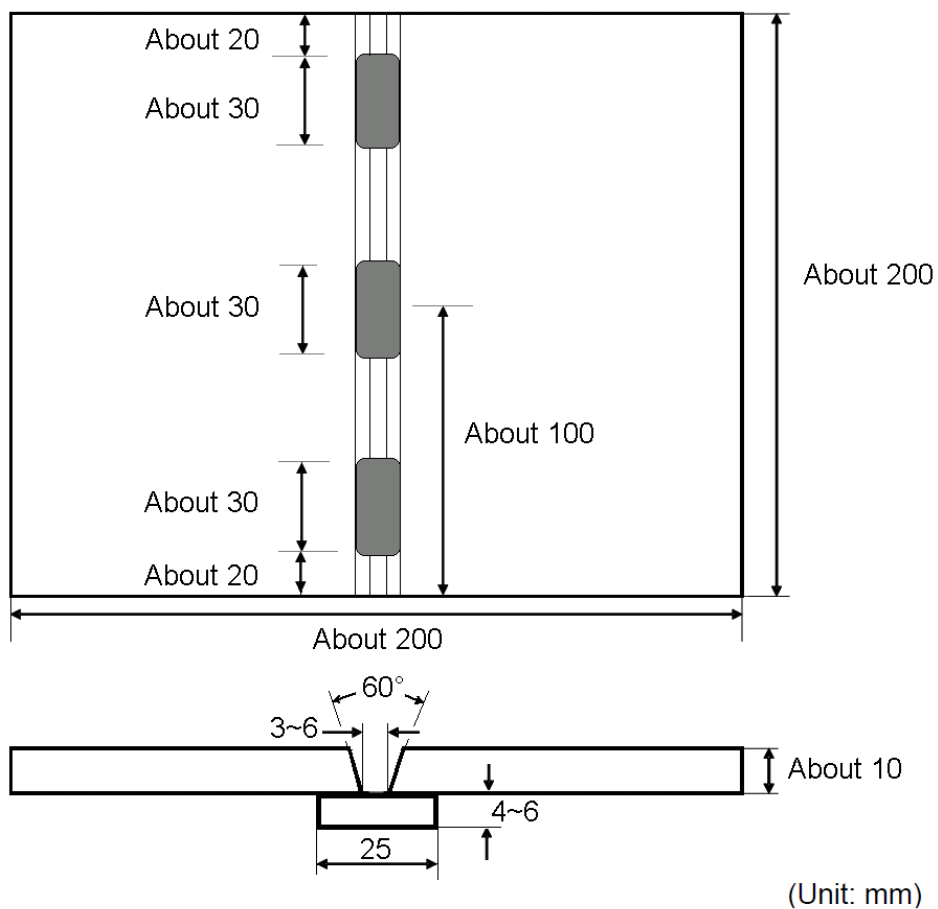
Dimensions and types of test assembly for tack butt welds
